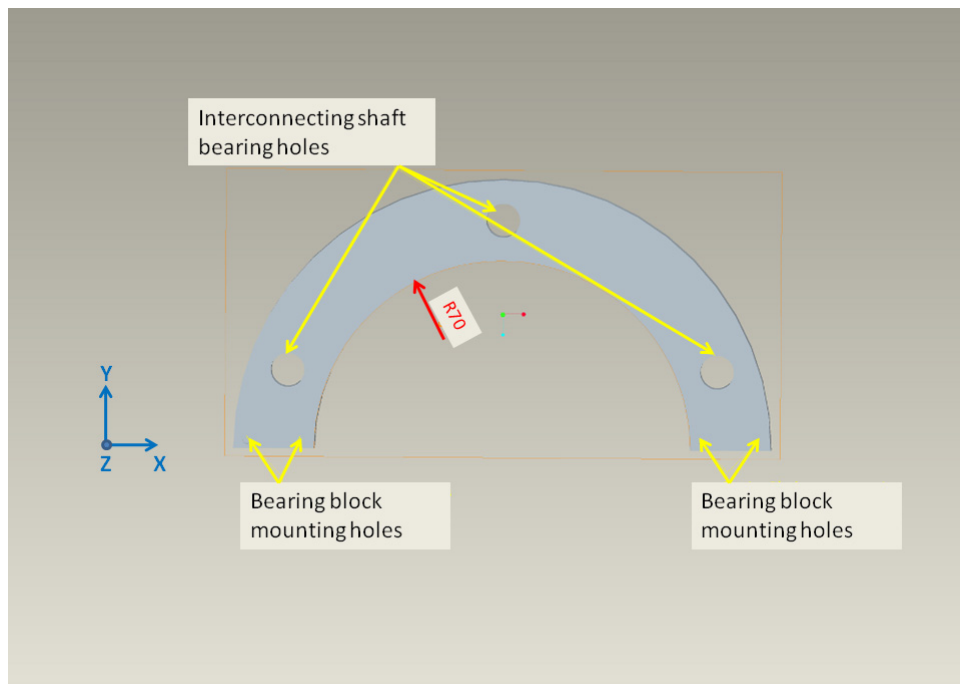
Mark I collar design highlighting bearing block mounting points and shaft bearing mounting holes.
